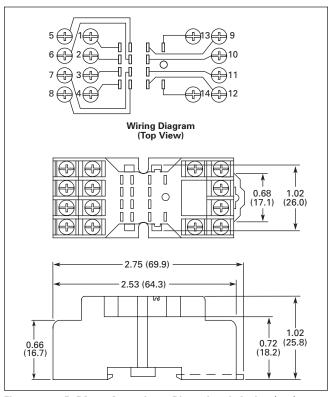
D2PA6 — Approximate Dimensions in Inches (mm)
